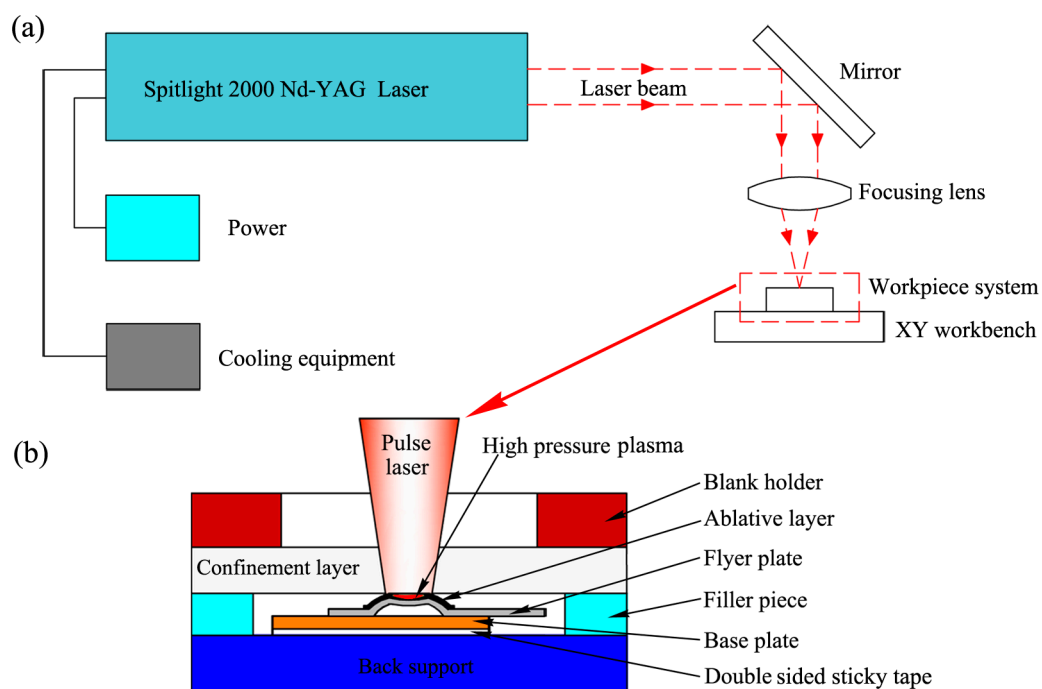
(a) The welding system of laser impact spot welding; (b) experimental principle of laser impact spot welding.
